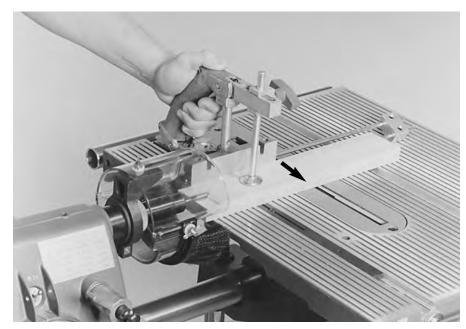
A router bit can be used to form edge grooves if this setup is employed. The feather board keeps the workpiece flat on the table.
